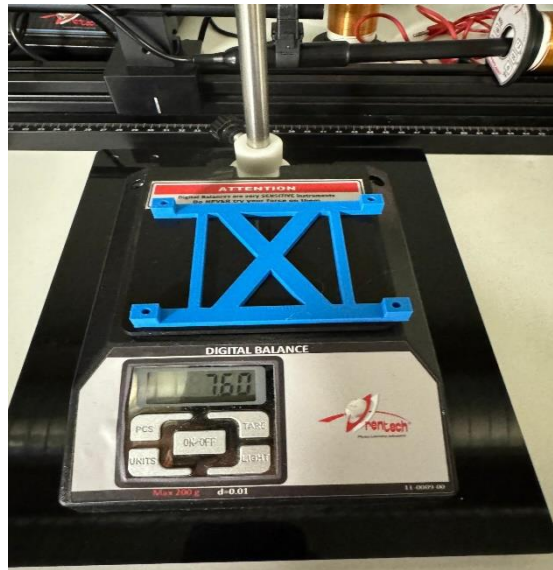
The robot chassis design obtained after topology optimization, produced using a 3D printer
